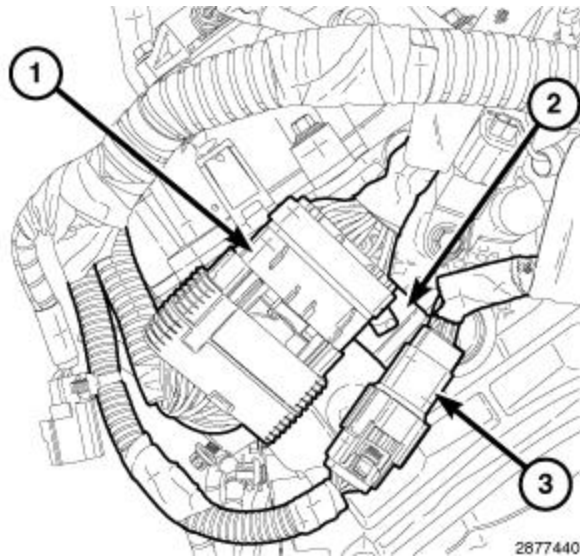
Injection/Ignition Electrical Connector & Engine Oil Pressure/Temperature Sensor Electrical Connector
